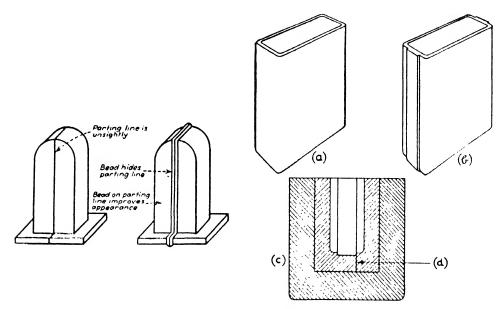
Unsightly parting lines can be hidden by throwing up a bead at the joint so that they form a part of the appearance design. A bead also permits the part to withstand cleaning by tumbling without scratching.
